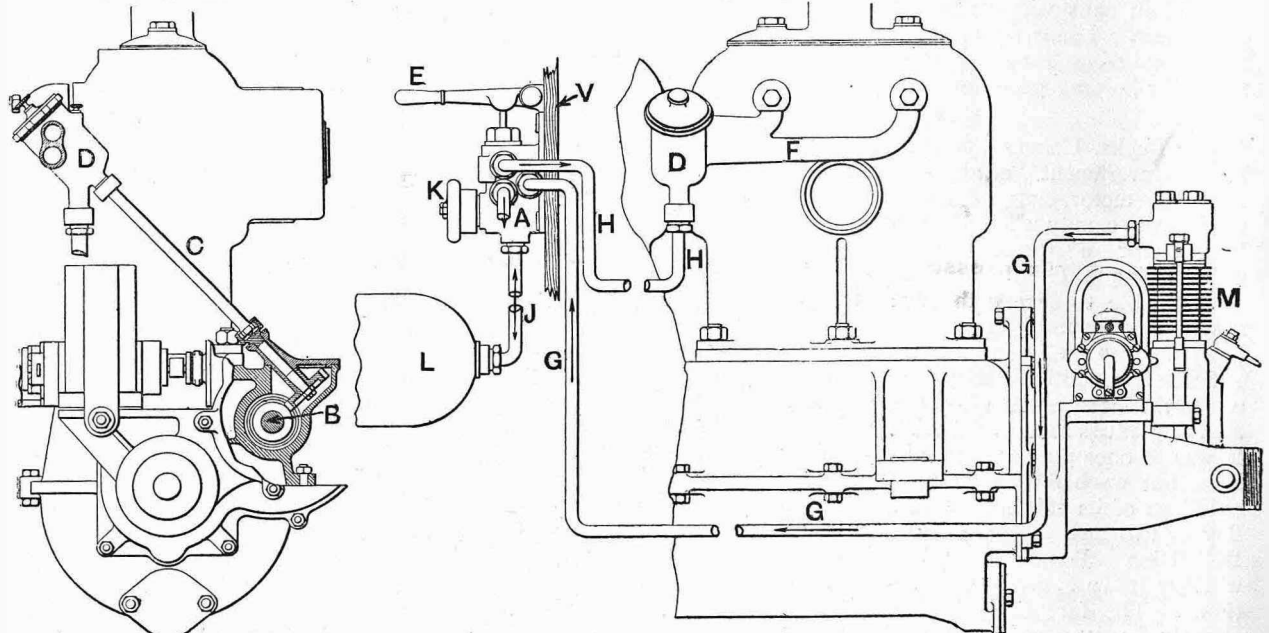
Sectional end view and side view of the disposition of the Renault self-starter.
